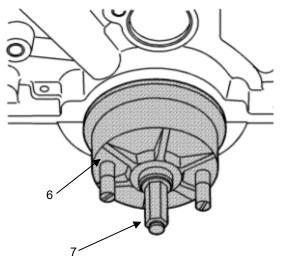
Special Tool J 42849 (6) and Center Nut (7)
